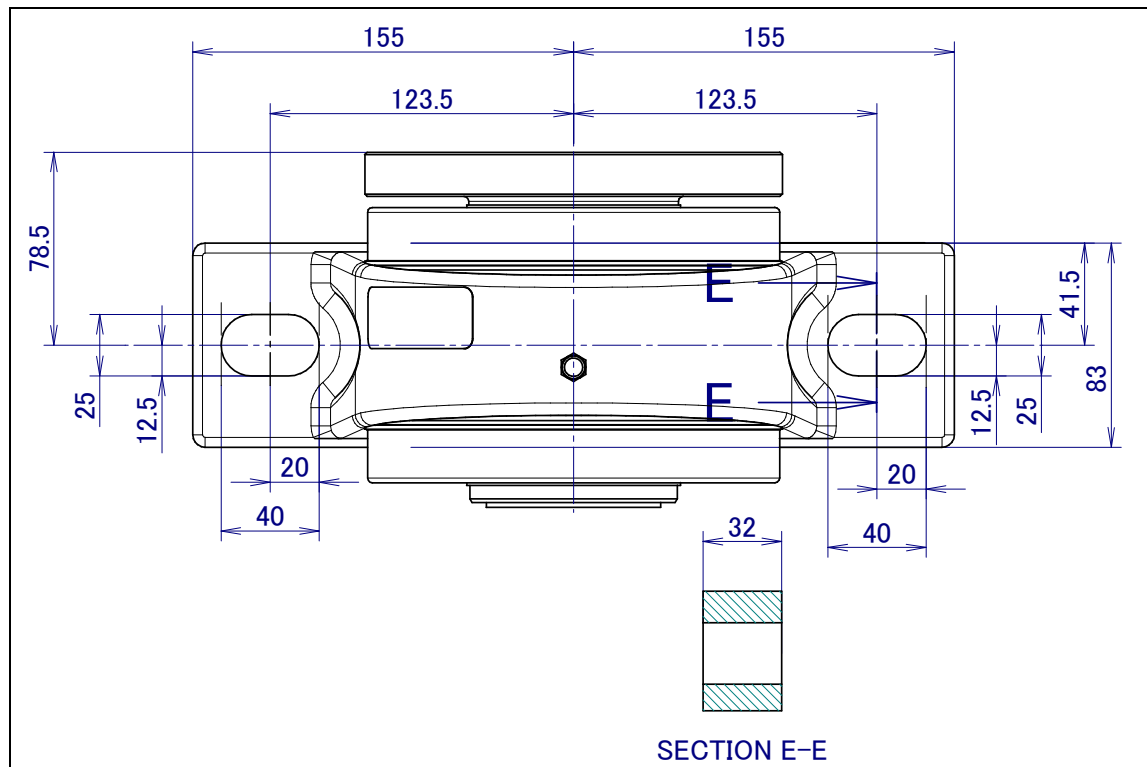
(f) Dimensions of the base of the positioner follower unit (non-insulated flange)
